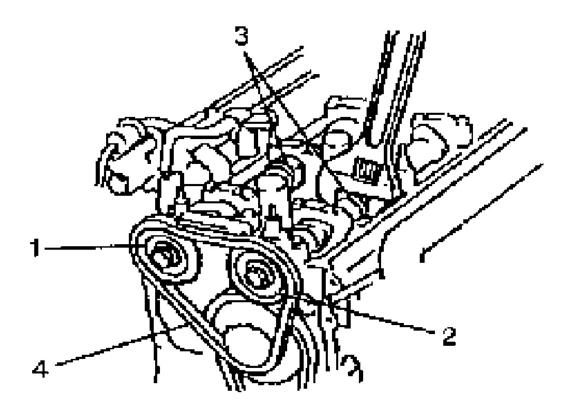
Removing Timing Chain Tensioner Adjuster No. 2 And Gasket Courtesy of SUZUKI OF AMERICA CORP.
